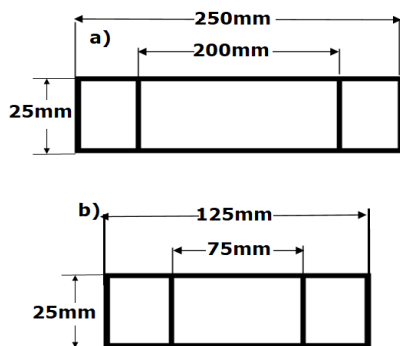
Dimensions of specimens: a) long specimen, b) short specimen applies to both and long specimens
